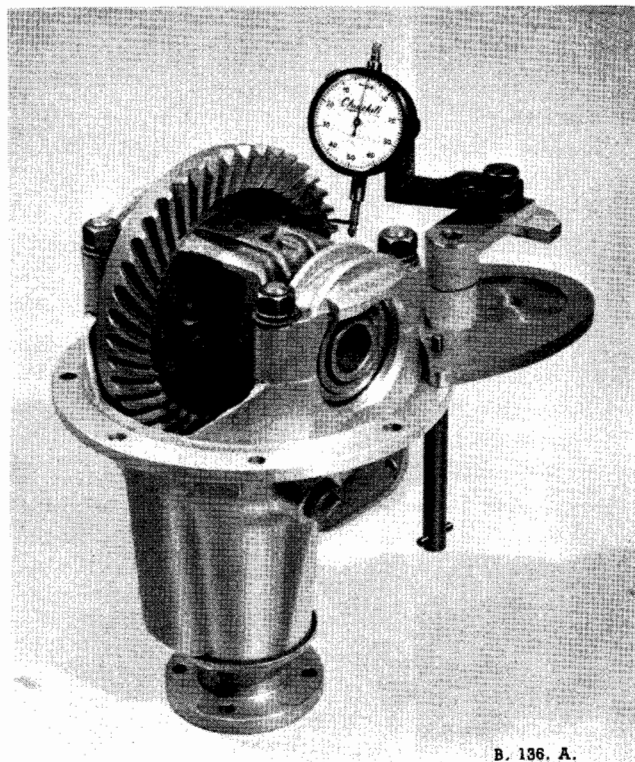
Checking crown wheel to pinion backlash (Service Tool No. 18G 191B).
